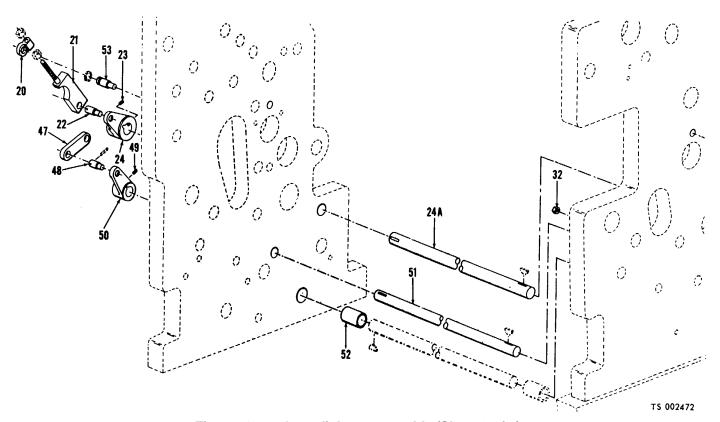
Outer linkage assembly (Sheet 2 of 2).
